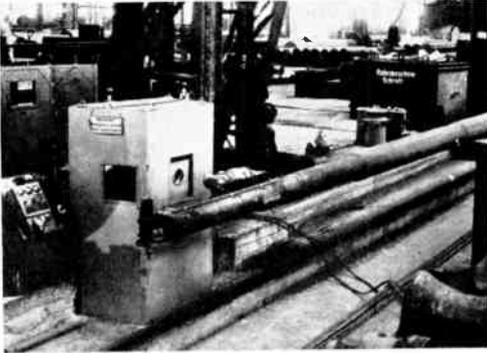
The X-ray tube is mounted on a long horizontal mandrel facing the aperture in the operator's cabin in which the image intensifier is mounted.
